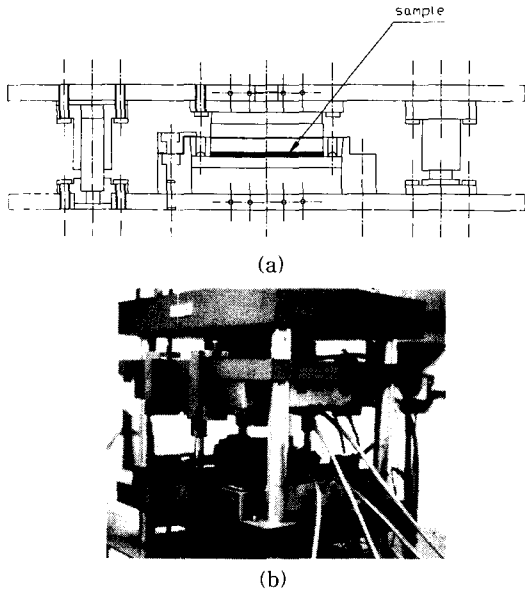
Schematic of the mold (a) and the mold installed in press (b)
